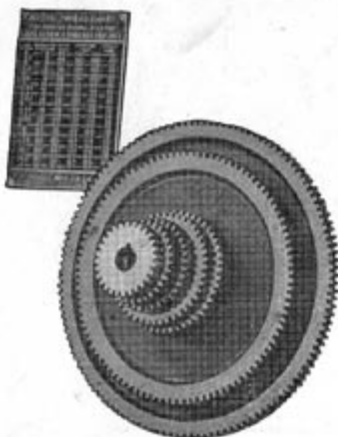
METRIC THREAD CUTTING GEARS FOR MODEL A LATHE.
